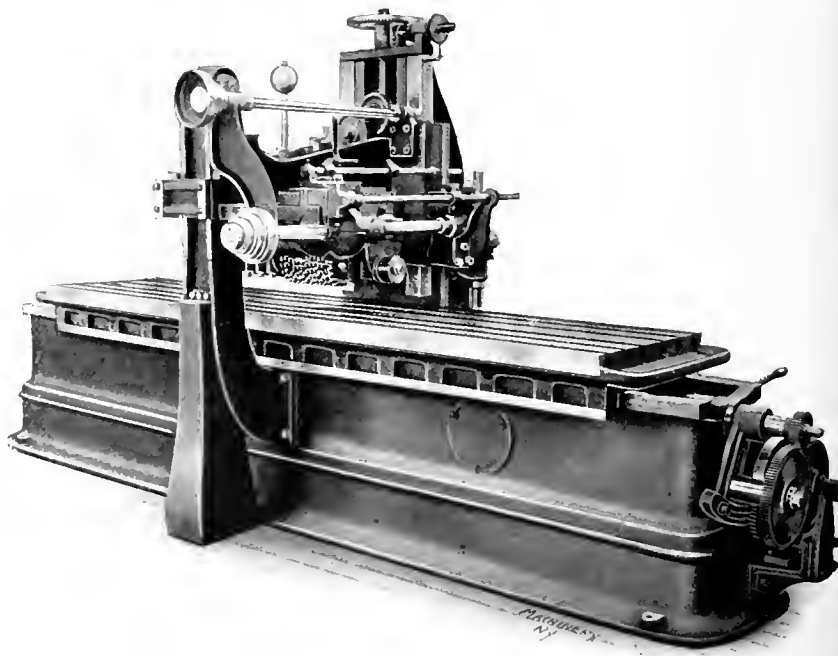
Heavy Automatic Rack-cutting Machine of the Open-side Planer Type, built by Walcott & Wood.
